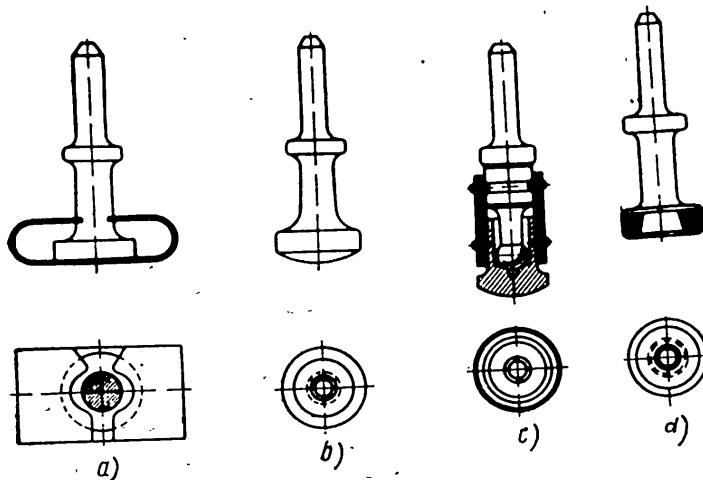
Types of Dies Used for the Reverse Method of Riveting
